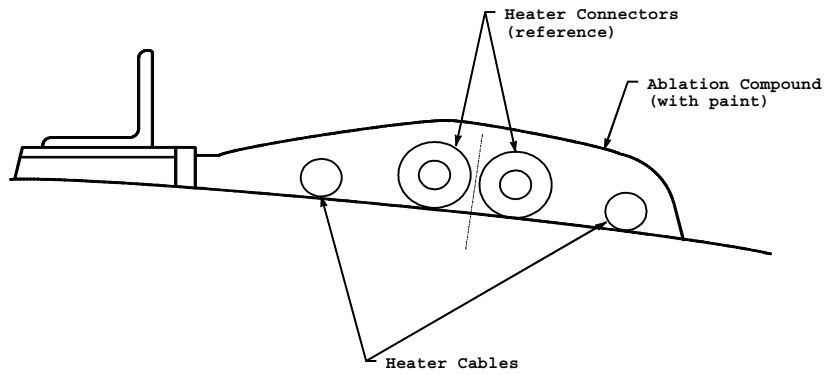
Heater Cables and Connectors Closeout (Section B-B)
